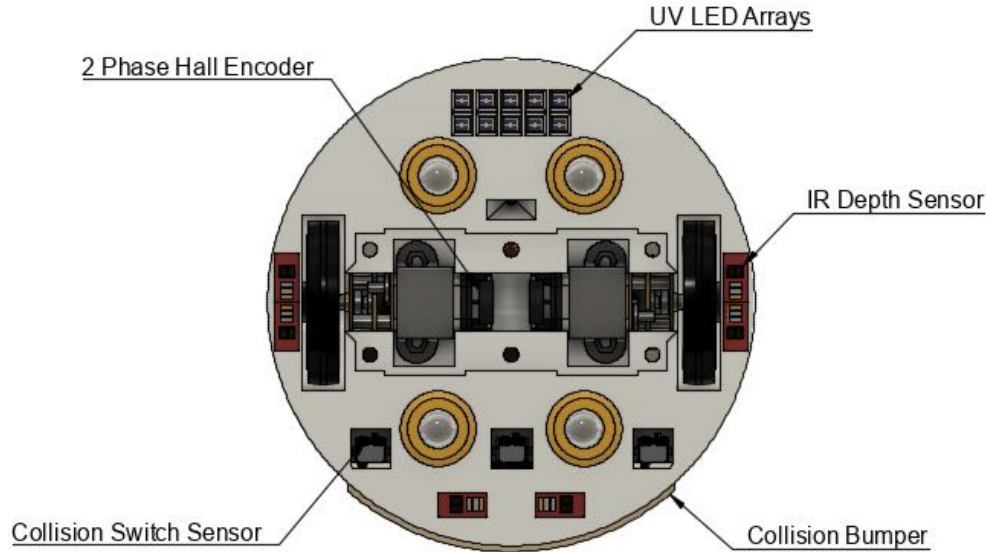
Detailed mechanical design in CAD (Bottom View) with labels
